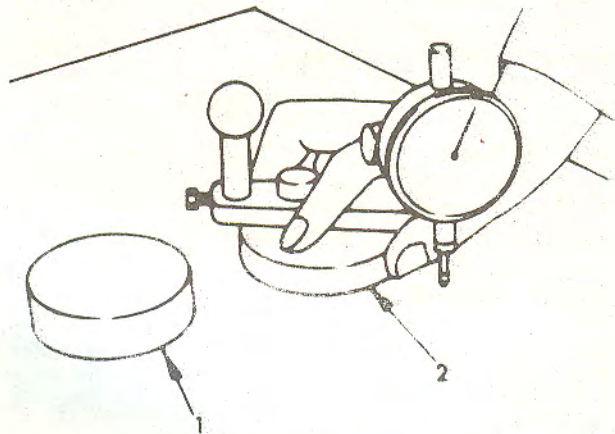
Using the gauge body (49 0727 570) to set the dial gauge to zero.
